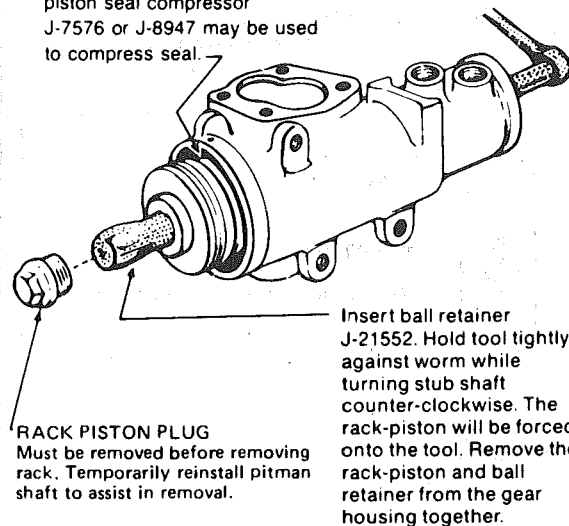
B7-14 Overhaul 800/808 Gear, Chart C
